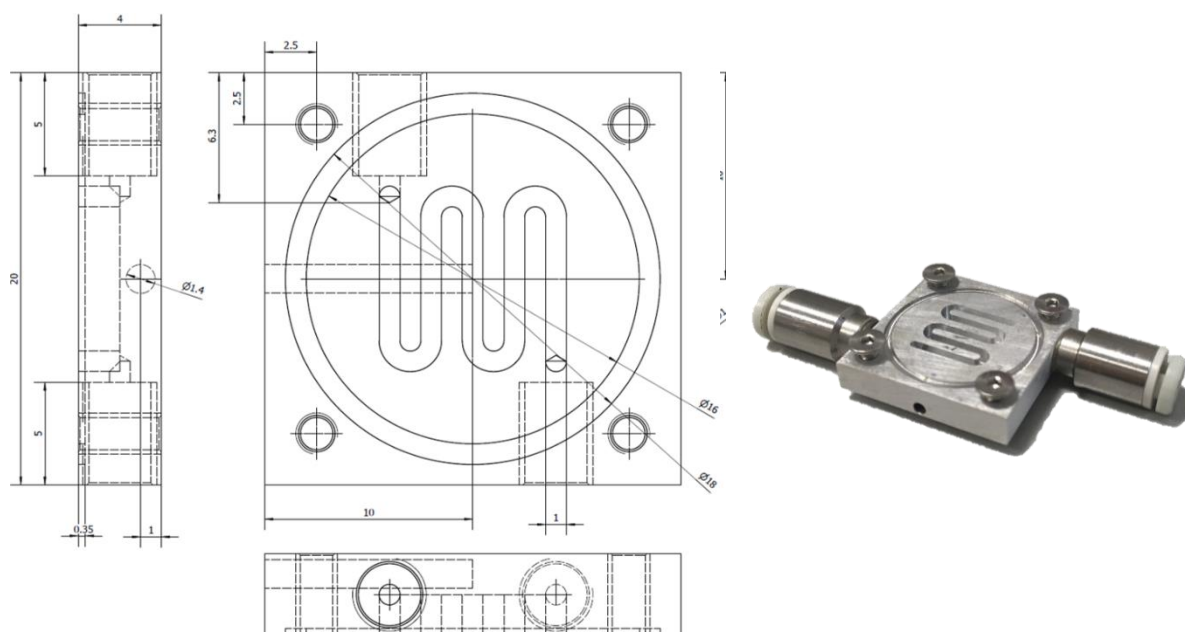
Adsorbent Chip. *Left:* Design and size specifications of the chip base plate. *Right:* the milled base plate, shown with push-fit connectors, and without cap.
